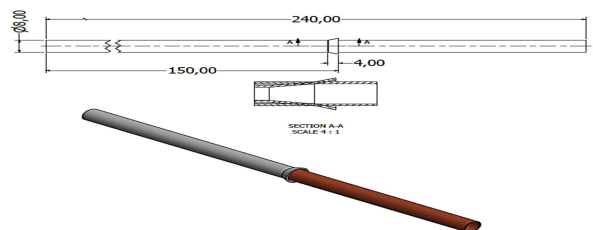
Dimensions of flared aluminum and copper pipe with brazed on the eutectic joint.
